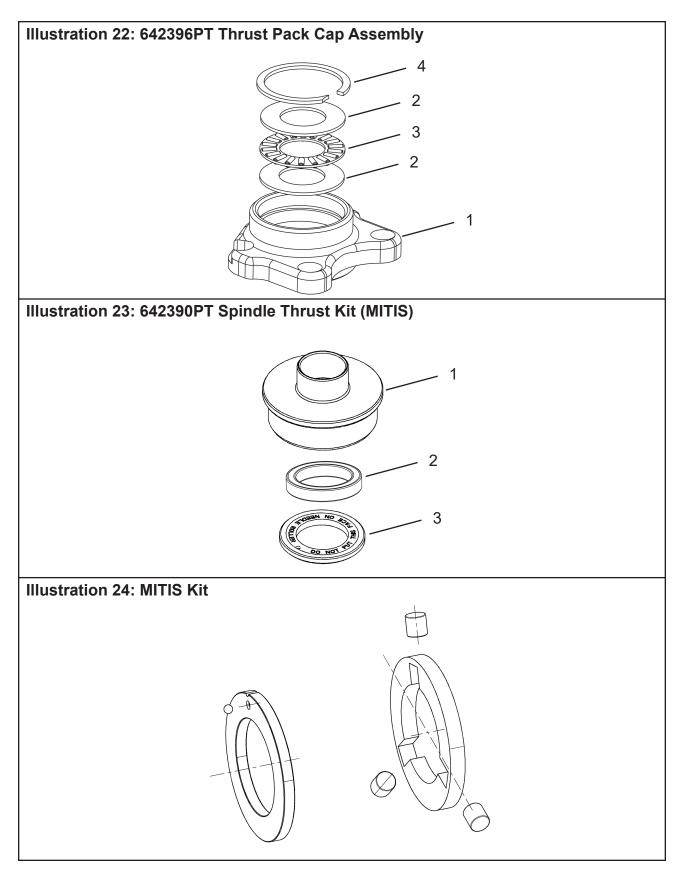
" - 642396PT Thrust Pack Cap Assembly
